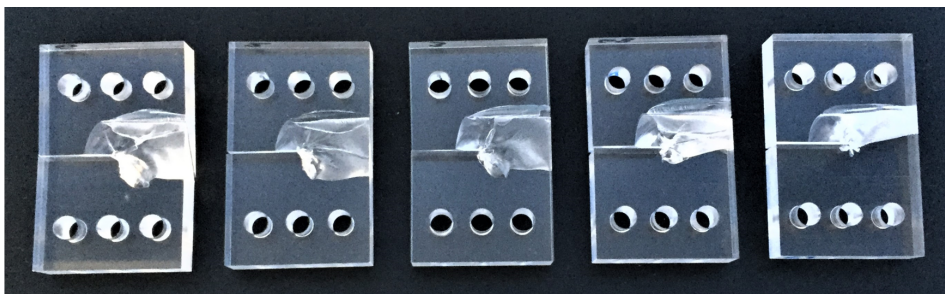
Specimen in plane crack paths for all C-fixture combinations, of J-fixture position  $\beta = 90^\circ$ , Pure Mode III.
